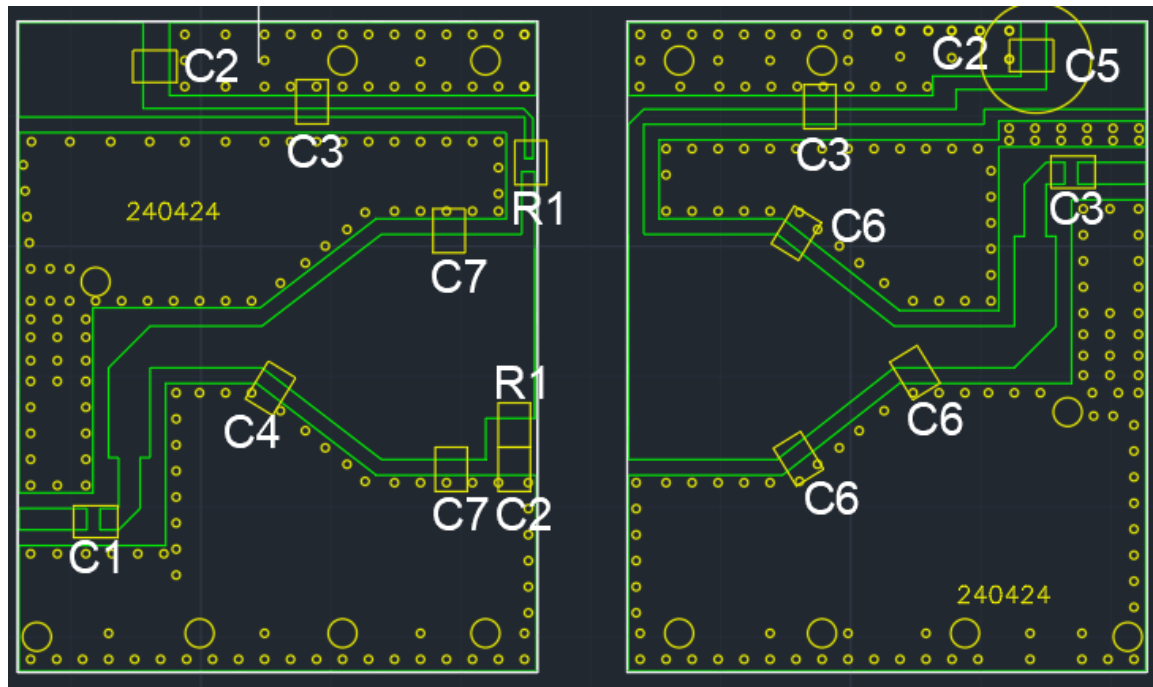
Test Circuit Component Layout, 30mils RO4350B
